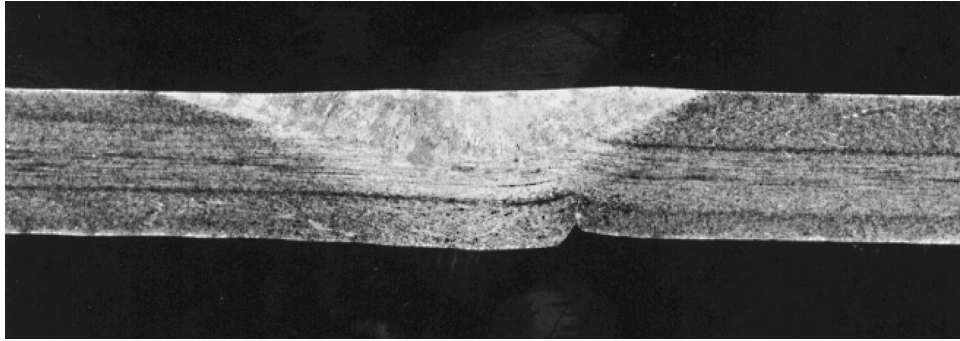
304 SS square butt weld (sample 1-4-C-2), $\times 10$.
